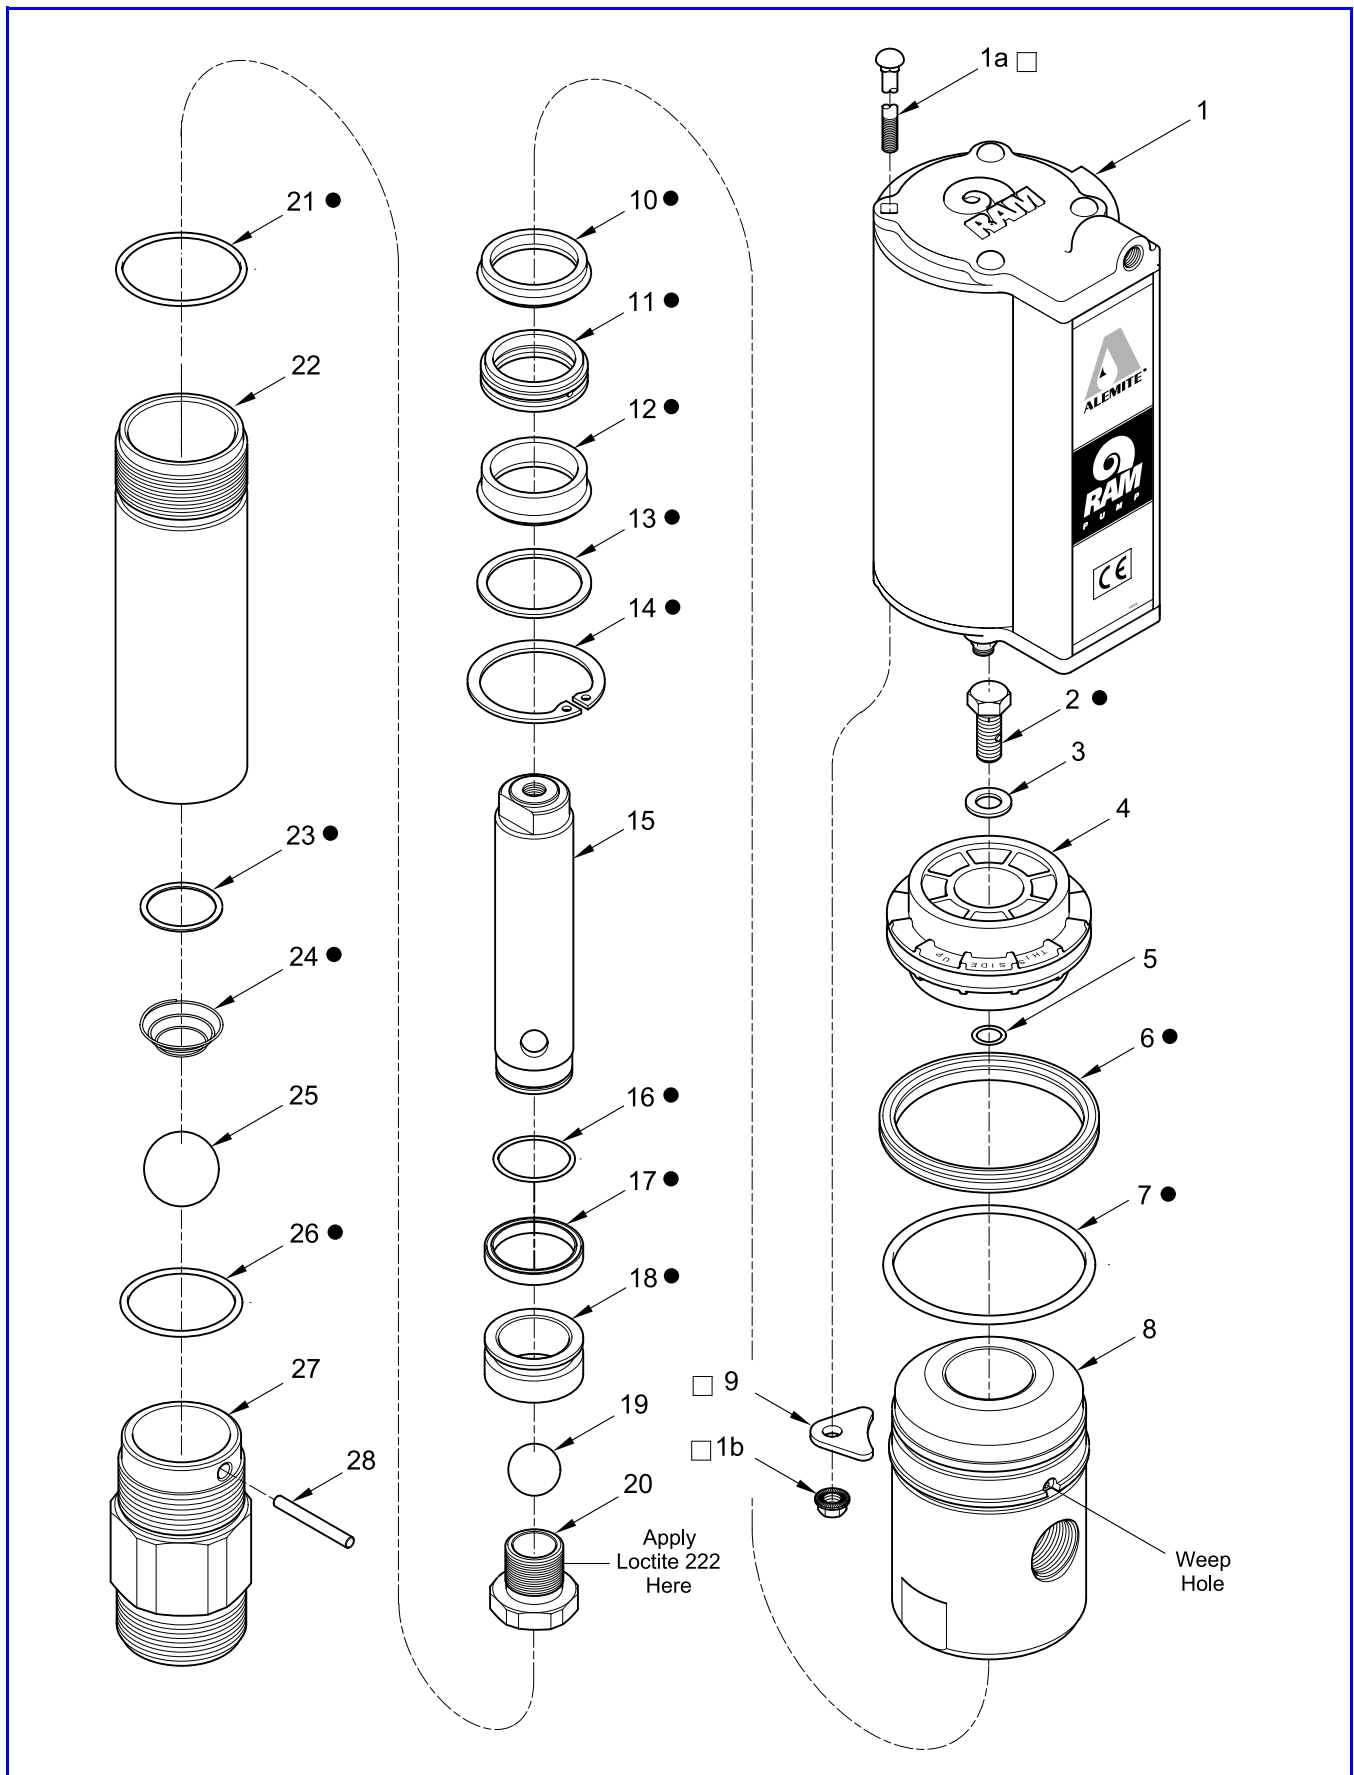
Low-Pressure Stub Pump Model 9918-A- Exploded View
